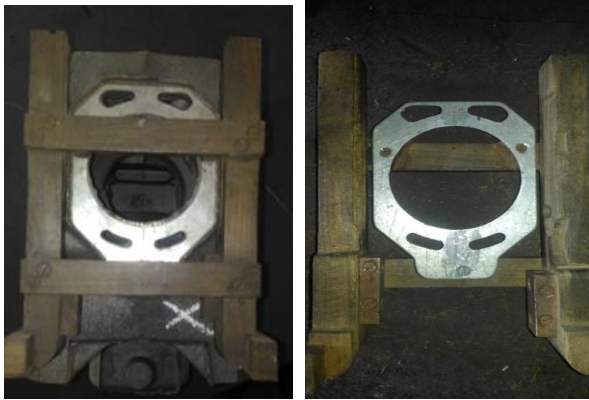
3 Test Using Gauge Special Gauge Used For Cylinder Frame
